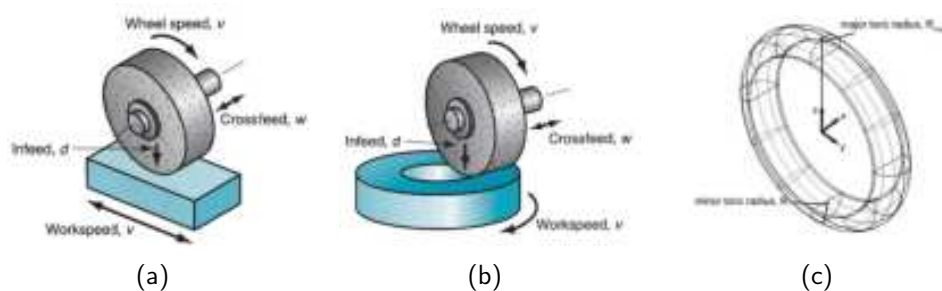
(a) Flat surface grinding [59] (b) Cylindrical surface grinding [59] (c) Toroidal grinding wheel. [12]
